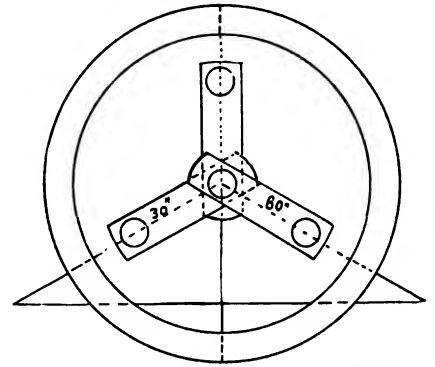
THE ANGLES OF A THREE-THROW SHAFT
